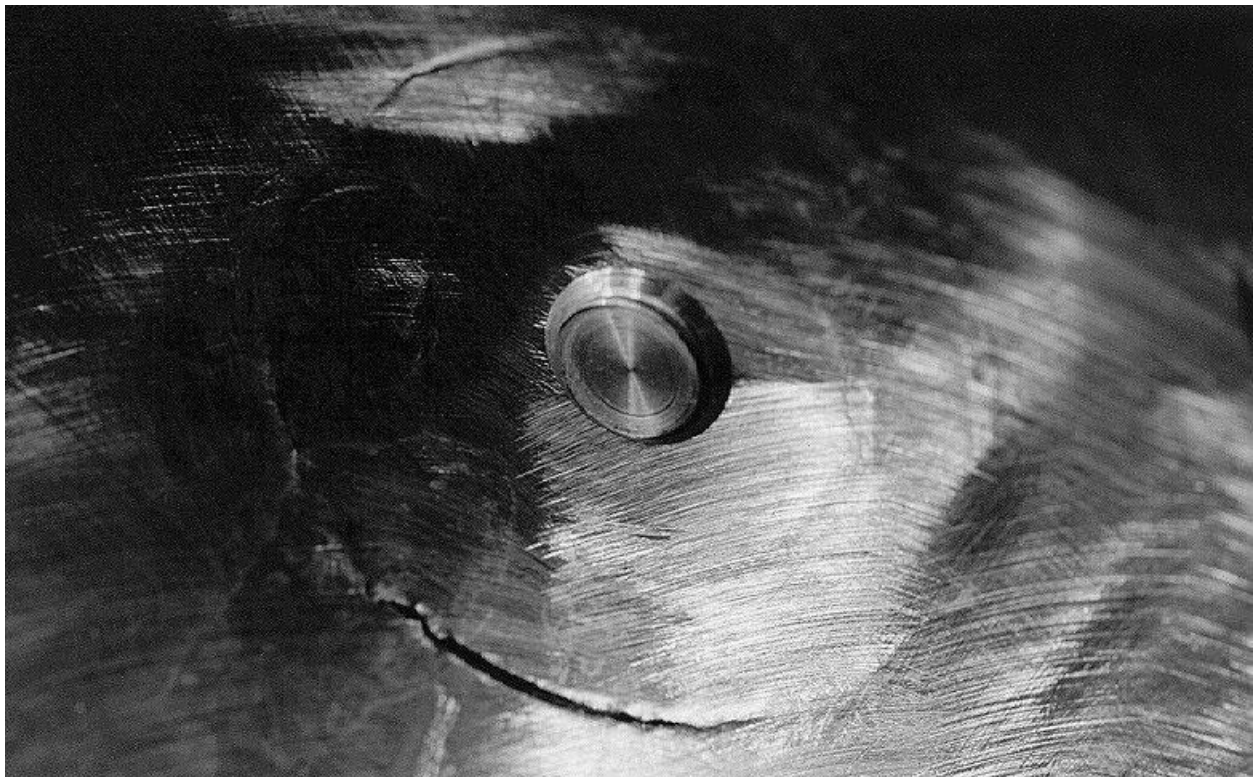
CTU; Close-up View of Cracked OCV Vent Port Coupling Inner Weld
